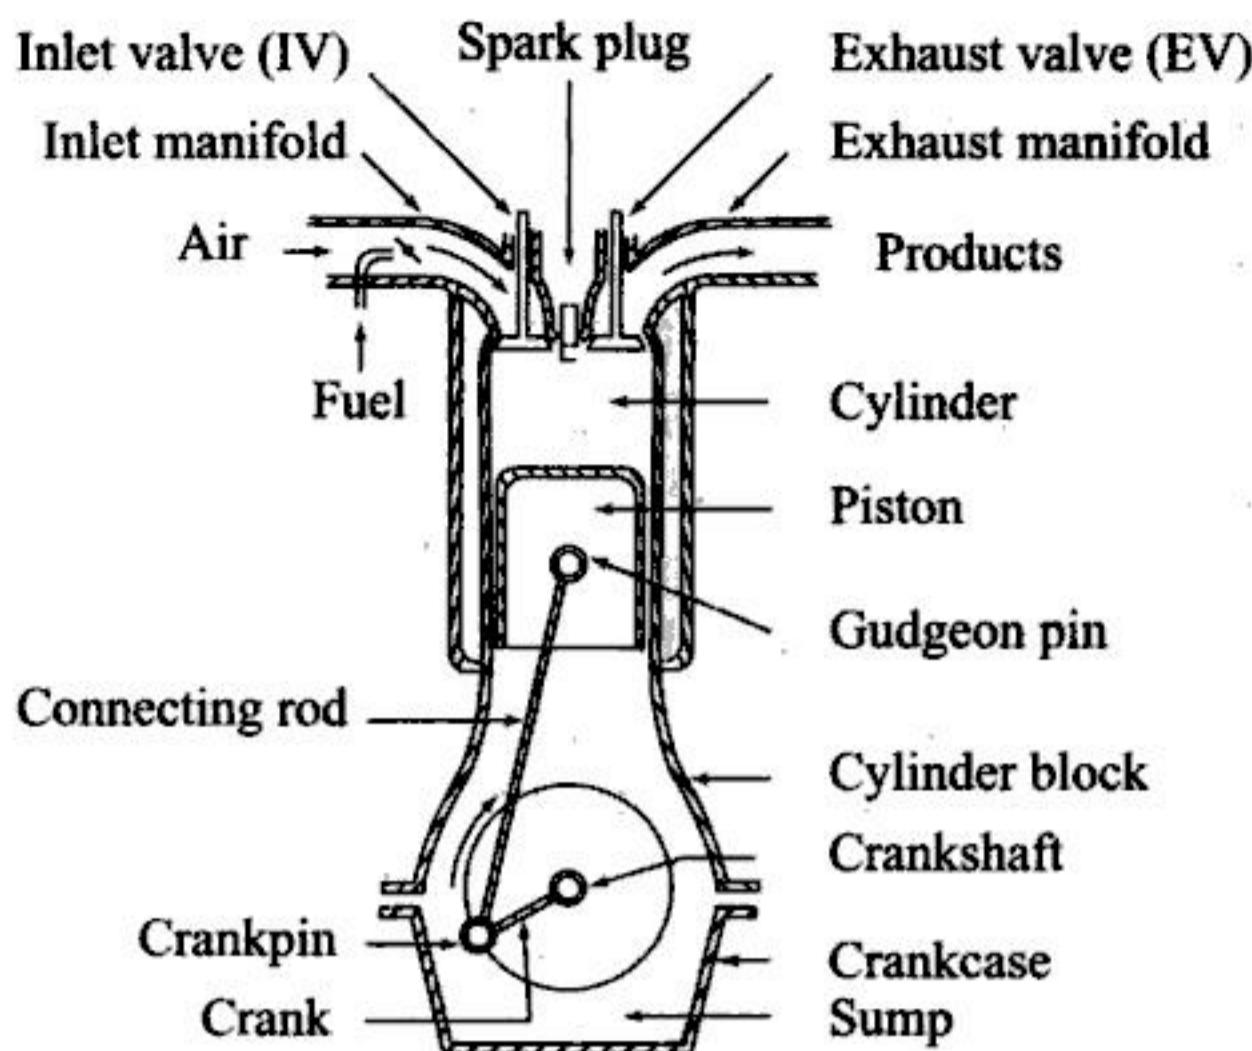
Cross-section of a Spark-Ignition Engine
